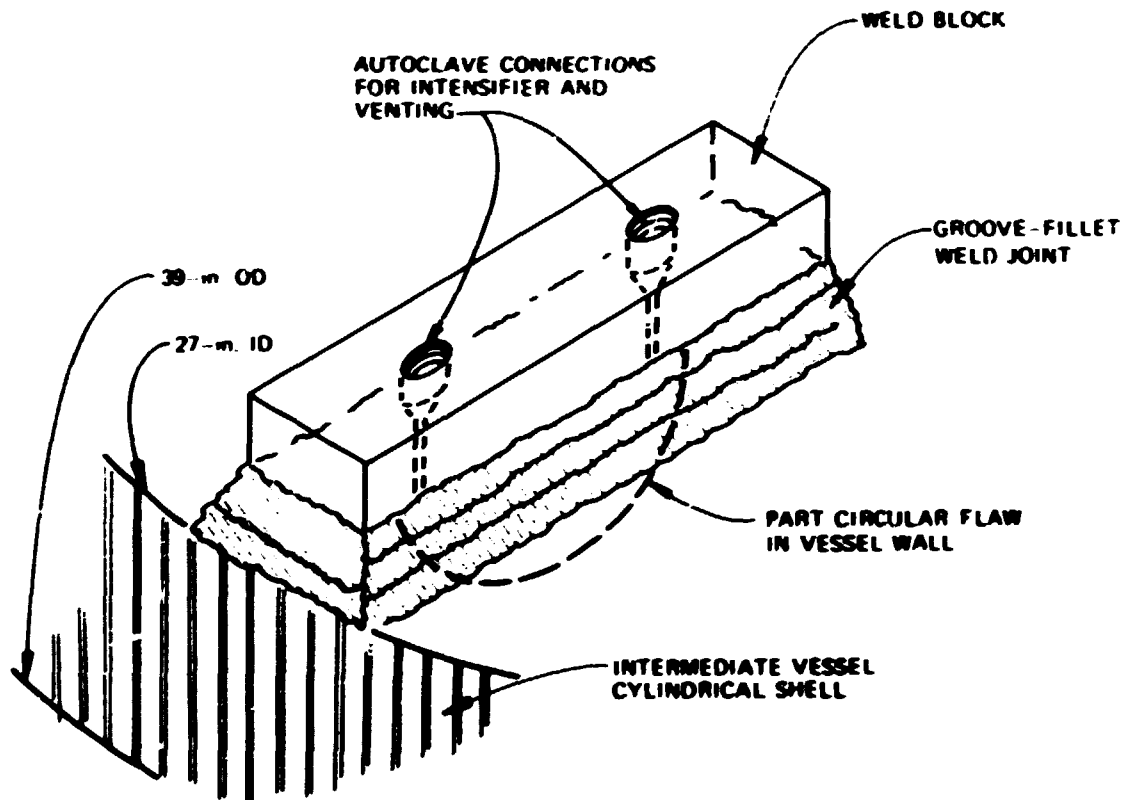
Schematic of weld block used in fatiguing flaw C of intermediate vessel V-6.
